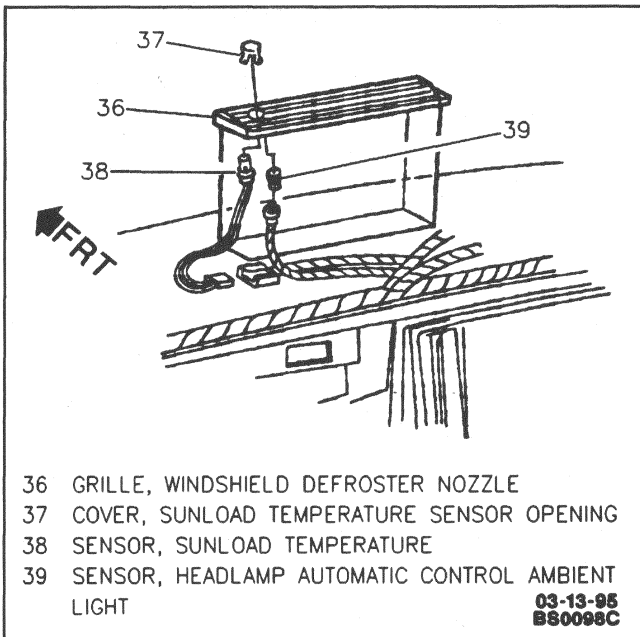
Windshield Defroster Nozzle Grille - (Typical)
